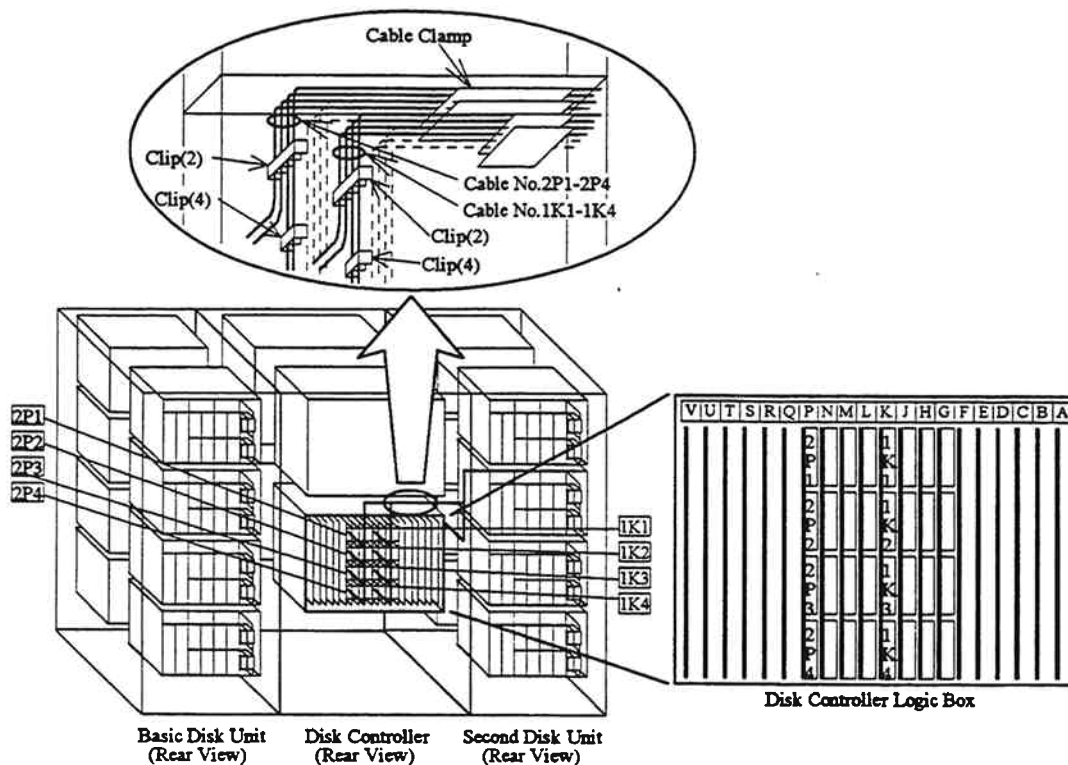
SCSI Interface Cable Disconnecting Diagram (Disk Adapter PCB Side)
